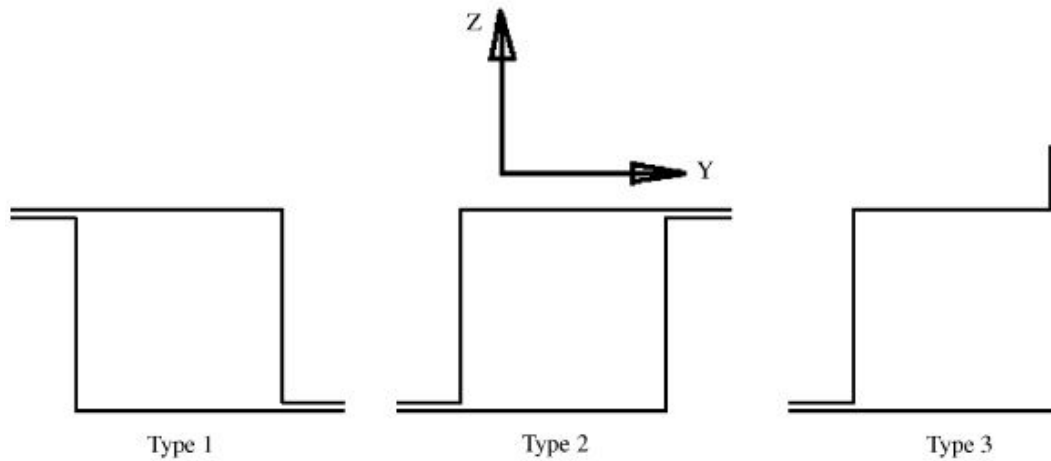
Proposed frame cross-sections (Tehrani and Nikahd, 2006).
